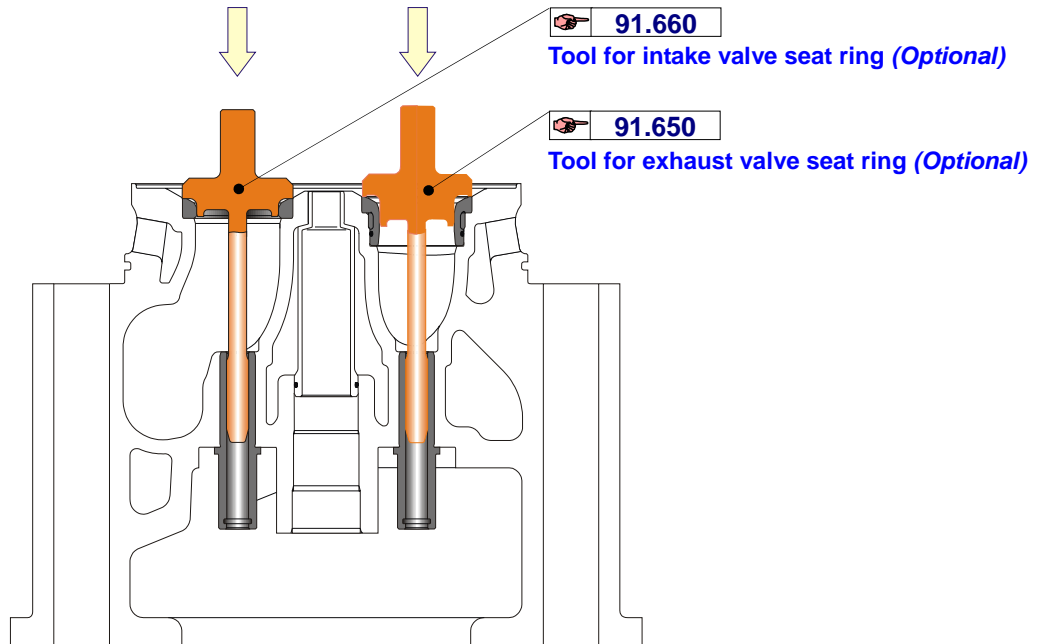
Mounting of intake and exhaust valve seat rings (흡기 및 배기 밸브 시트 링의 조립)
